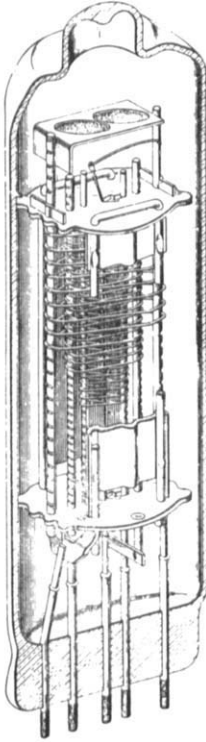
Cutaway view of a subminiature pentode. The bulb cross-section dimensions are approximately $\frac{2}{3} \times 1$ cm ($T2 \times 3$), outside. (Courtesy Raytheon Manufacturing Co.)
